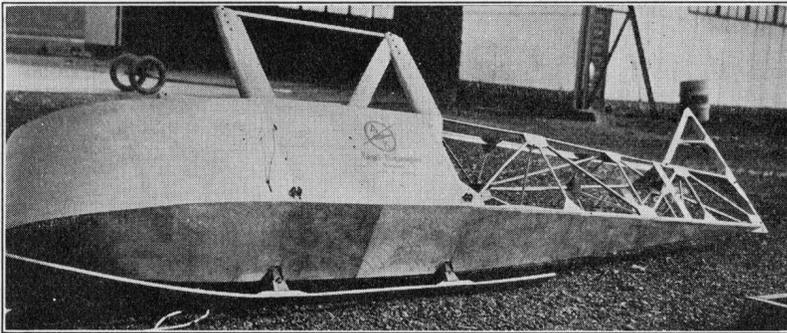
Plate XL. The Bottom of the Prüfling Fuselage, Showing the Attachment of the Skid
